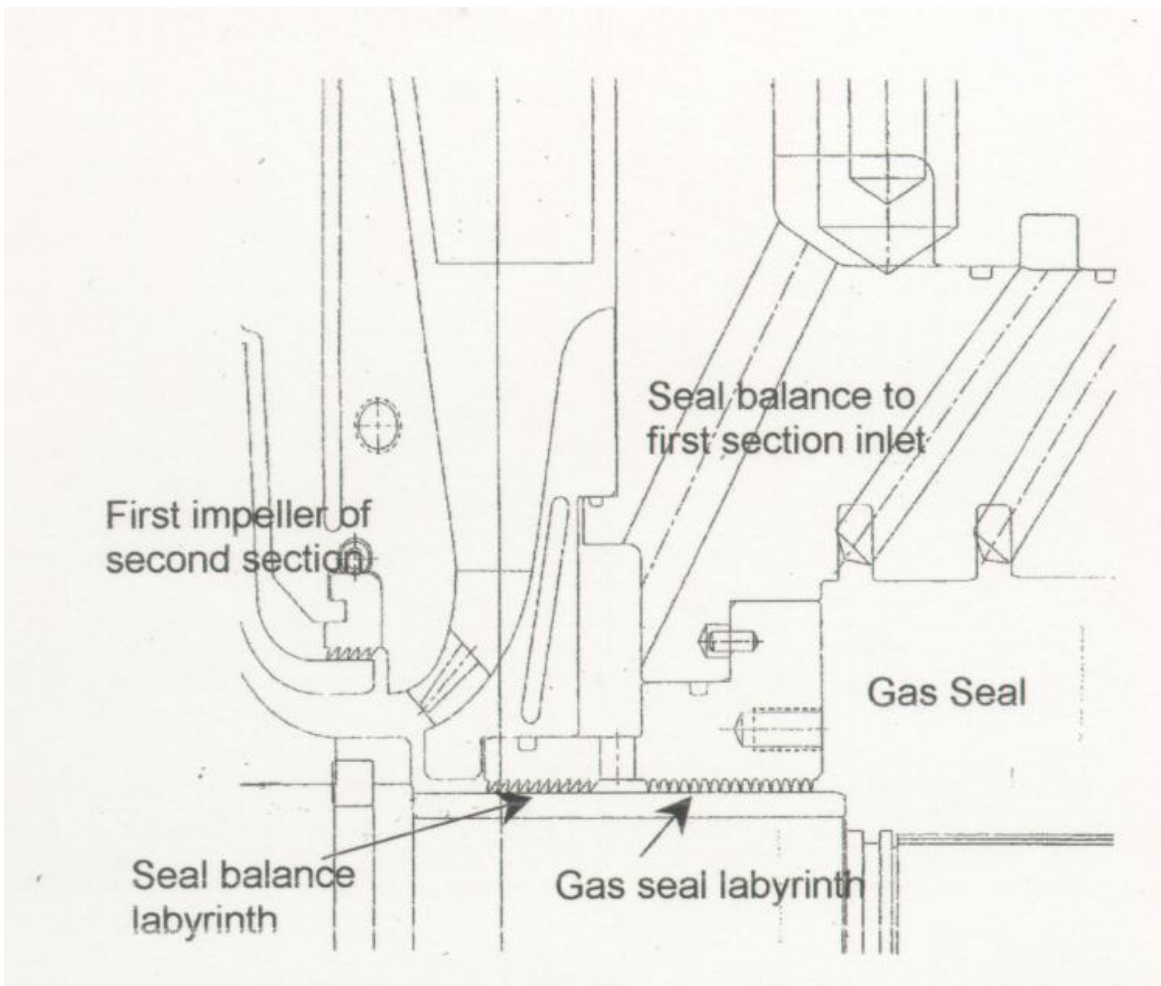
Back-to-Back Compressor Seal Cavity (Initial Design)
